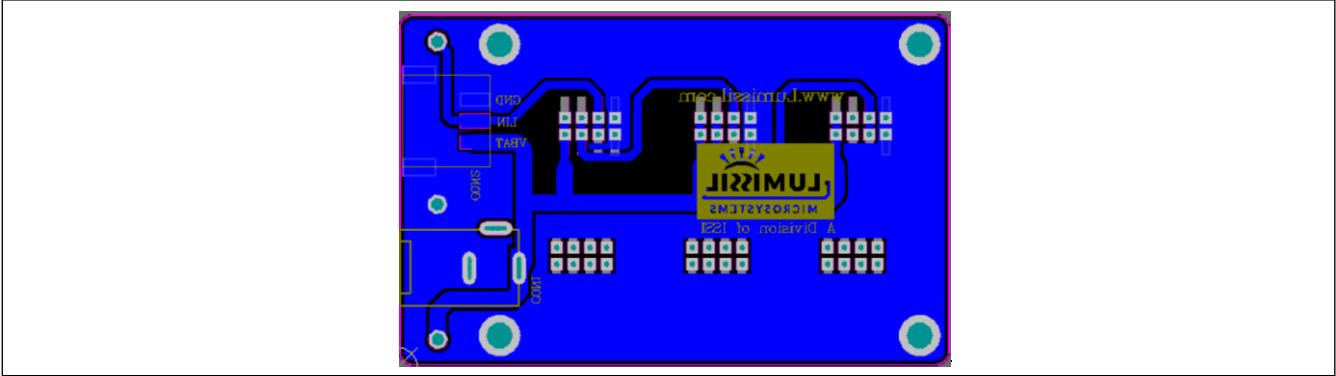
PCB Bottom View of IS32LT3183A Main Board
